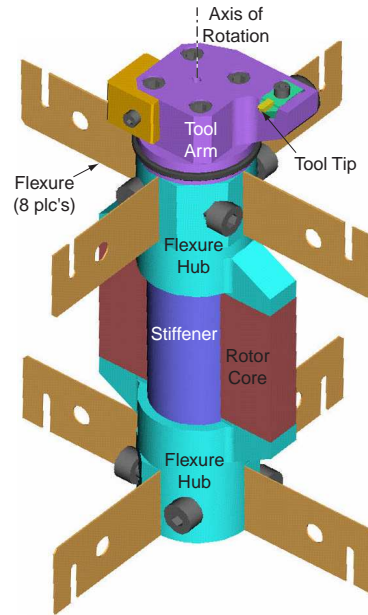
Model of the rotor with a tool arm and flexure suspension.
